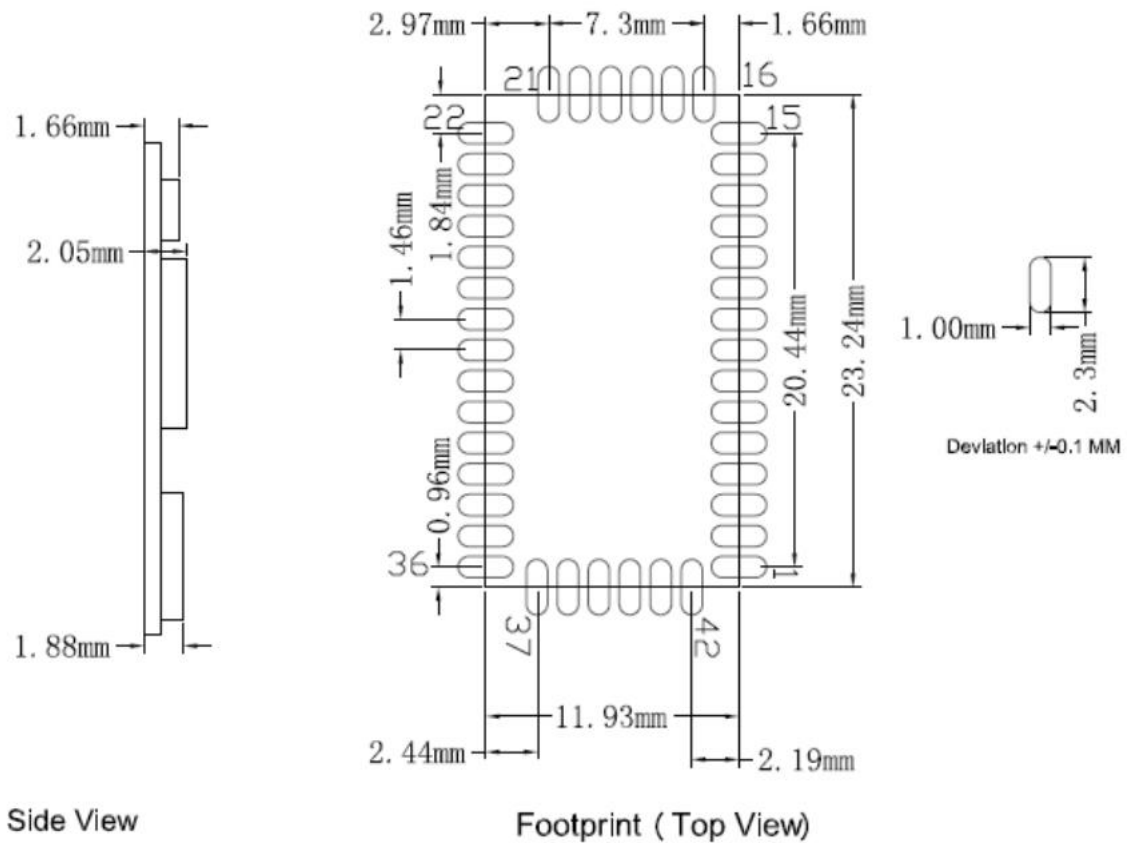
Recommended PCB Mounting Pattern (Unit: mm, Deviation:0.02mm)TOP View
